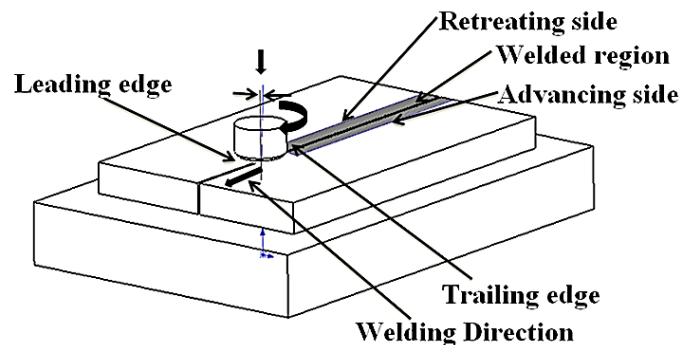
Schematic diagram of Friction Stir after Welding process
